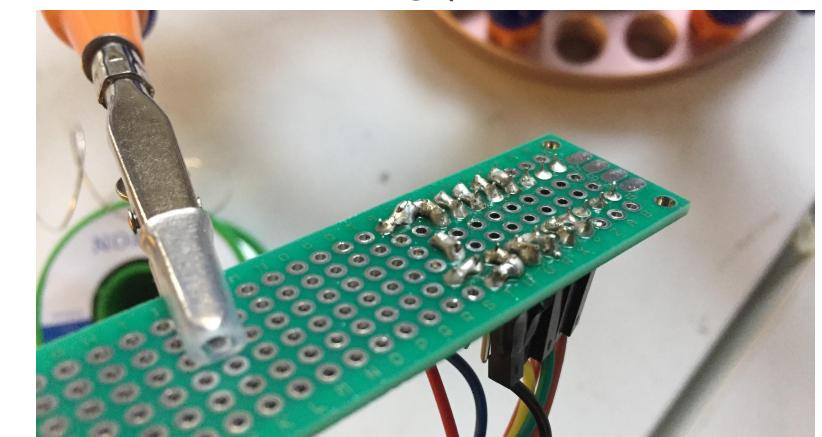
Soldering the integrated circuit and motor headers to protoboard.
